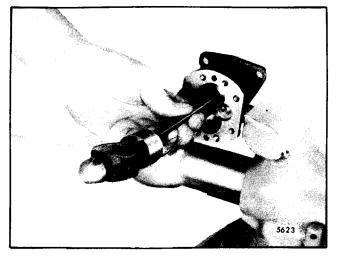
Removing Oil Seals using Tool J 1508-13
